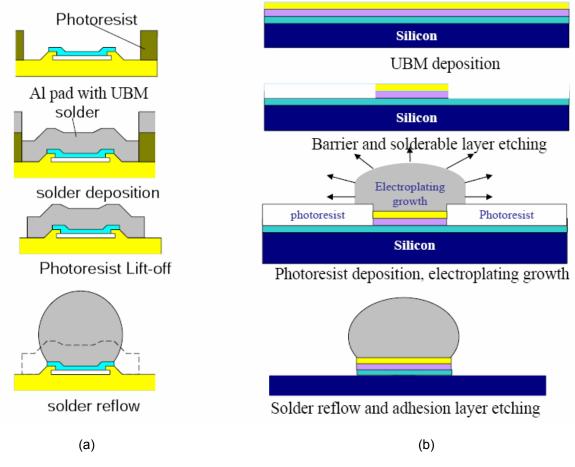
Two typical forming processes of flip chip solder bumps (a) Evaporative (b) Electroplated
